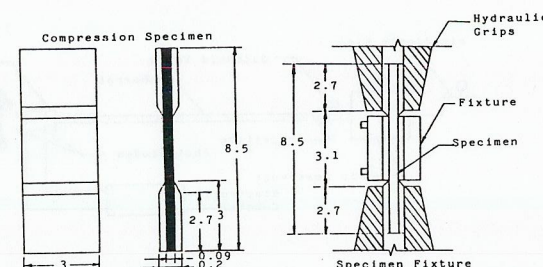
Schematic representation of specimen configuration and gripping arrangement.
